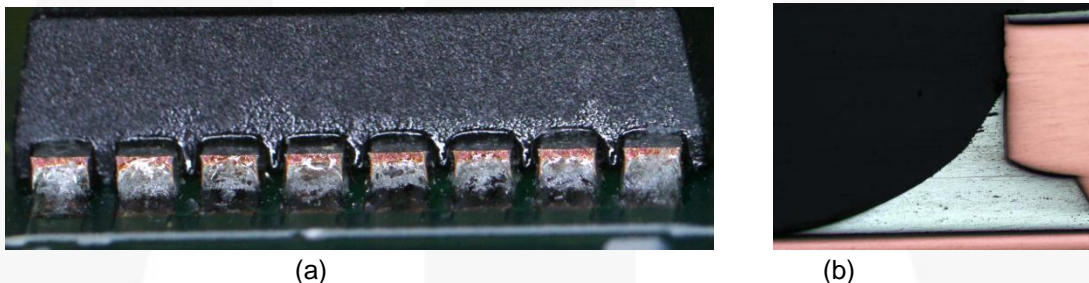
(a) Side View Showing Leads Solder Joint, (b) Cross-Sectional View of Leads
